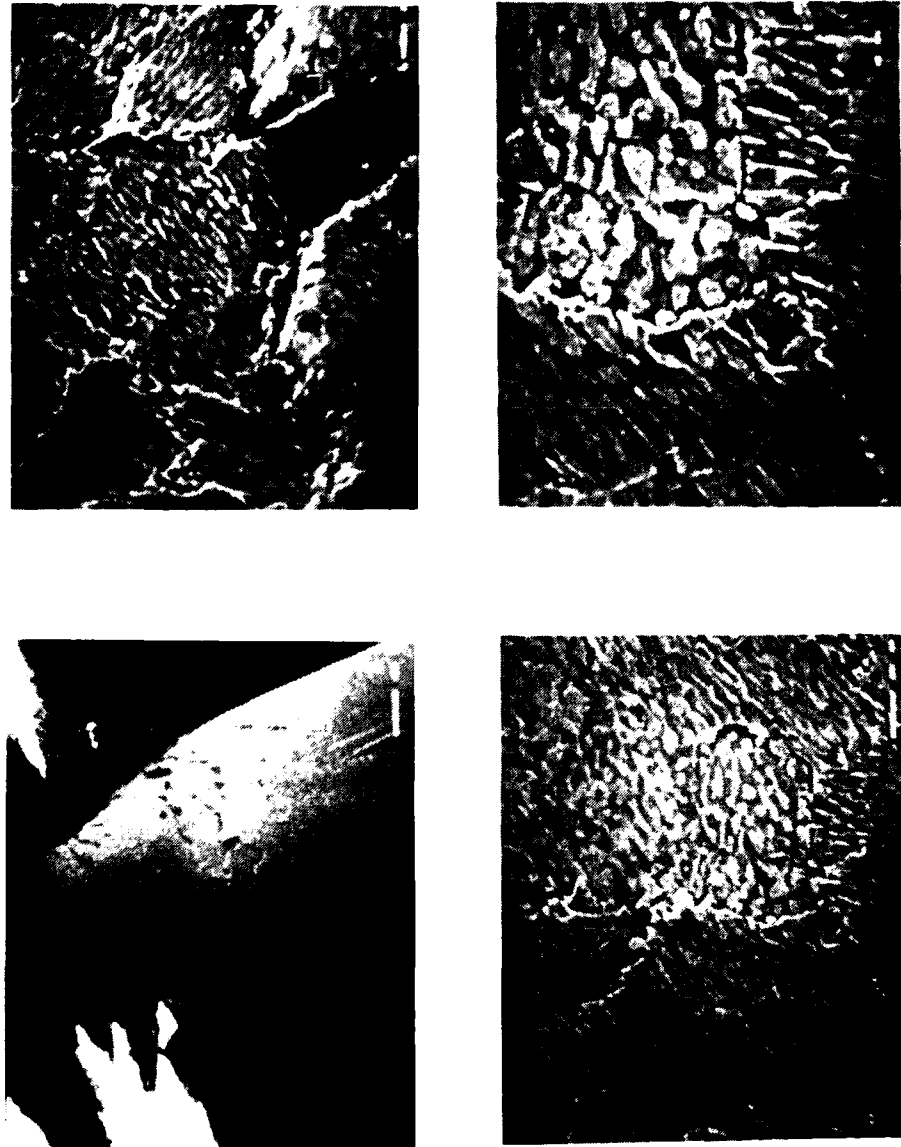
LCCC Solder Joint Stress Crack
